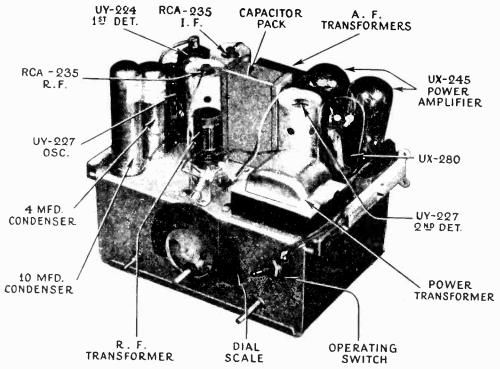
Top View of Chassis Showing Location of Radiotrons and Parts
